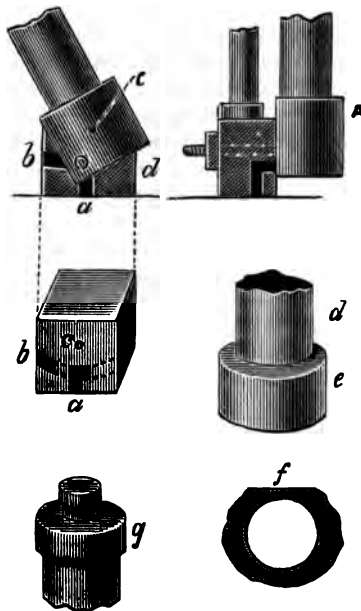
ARRANGEMENT OF STEAM BLOCK AND CYLINDER.
